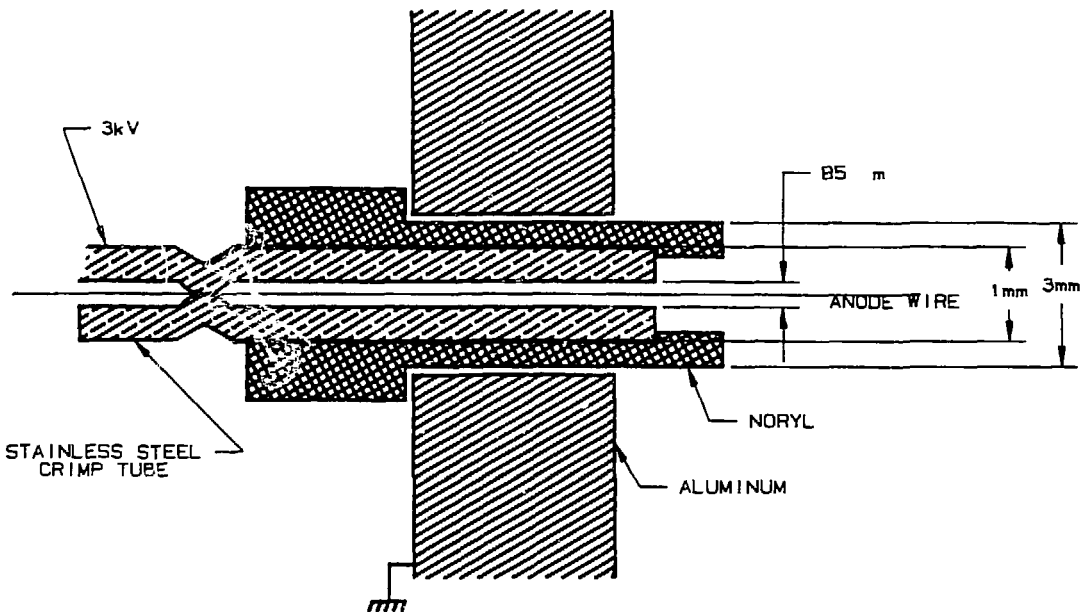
Feedthrough arrangement with crimp tube positioning wire precisely. Large enough diameter lowers the electric field.
